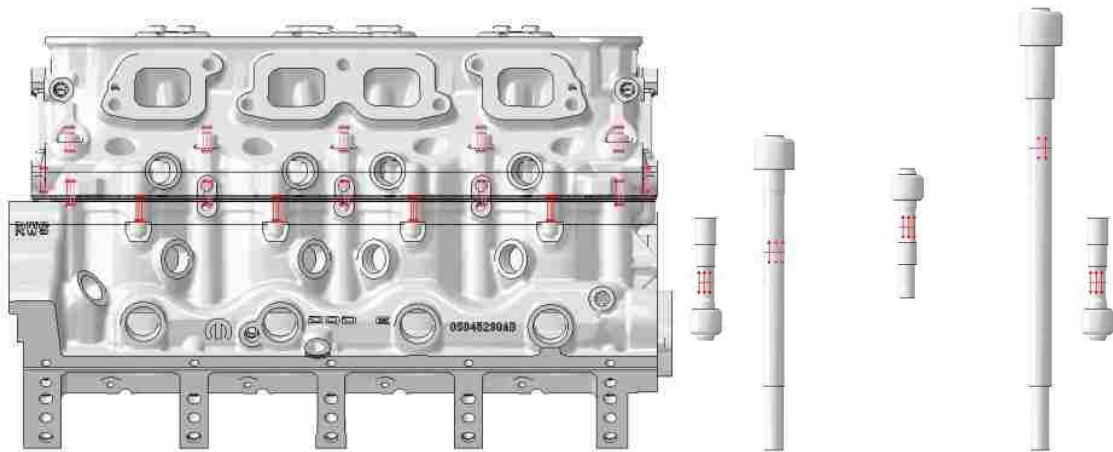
Bolt loading conditions for full bank. Full engine view (left) and end view with engine hidden (right)
